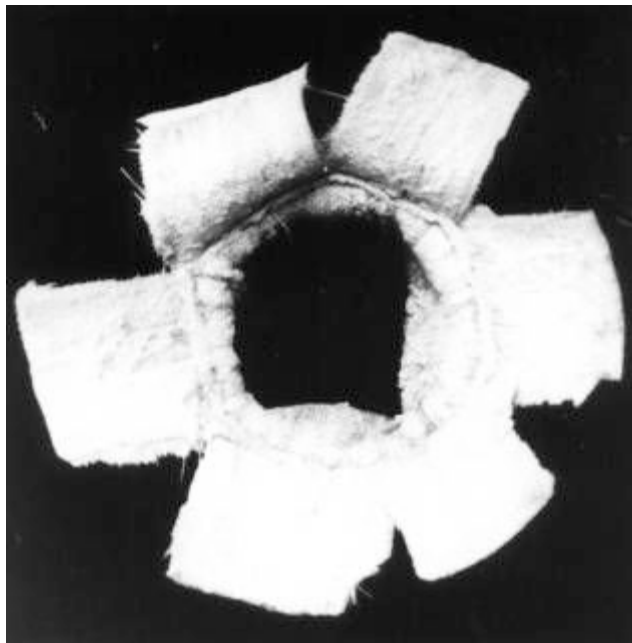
Axial macro photograph of the crush zone of a Tufnol tube crushed at 100 °C showing six fronds.
